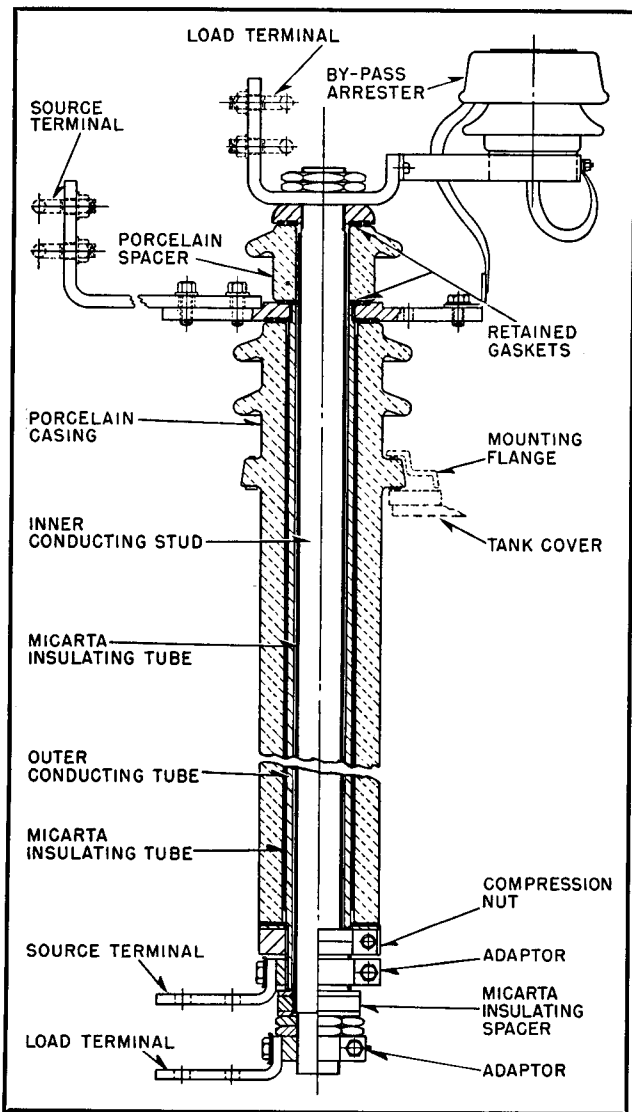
Concentric Lead Bushing for Type URS Step Regulator
